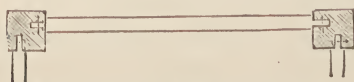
PLAN OF FRAMING OF KITCHEN TABLE.
